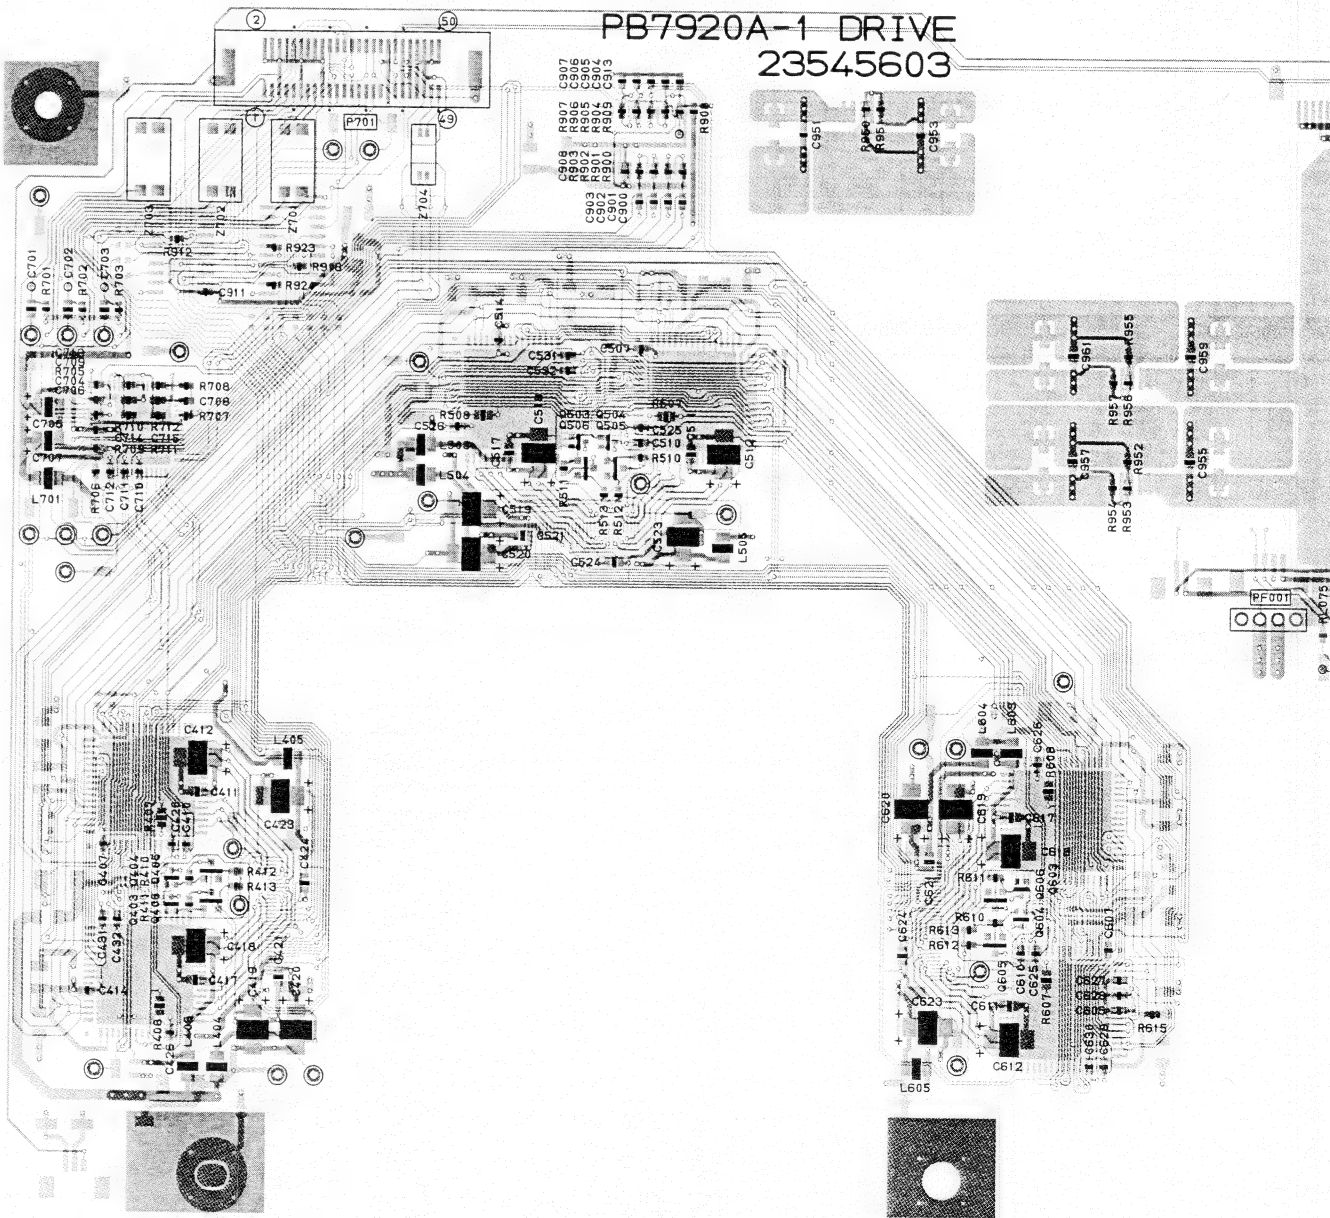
U0011 Drive PC Board (Top Side)
